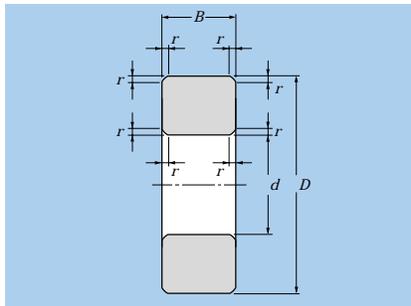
Radial bearings (excluding tapered roller bearings)
